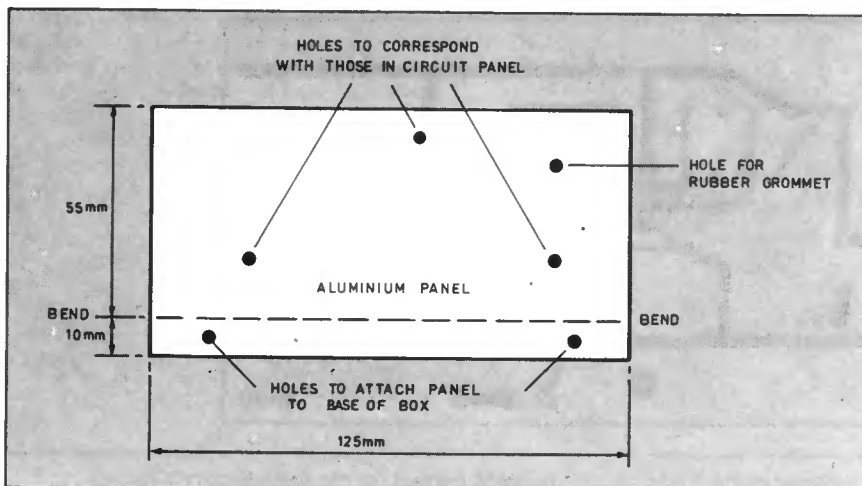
Shaping the aluminium panel to which the p.c.b. is mounted.
